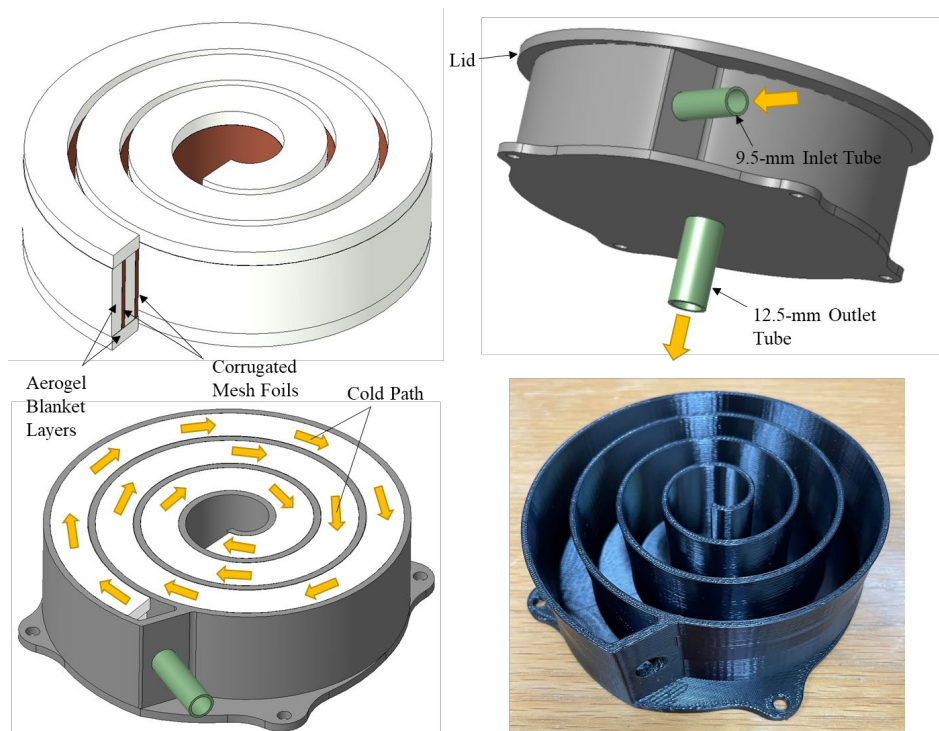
Prototype v2.0: CAD renderings of CFC (upper left); gas inlet/outlet layout (upper right), and spiral flow path (lid removed, lower left); and final 3-D printed body (lower right)
